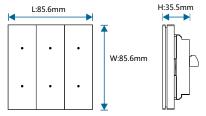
Dimensional Drawing - Front View Figure 6. Dimensional Drawing -Sideview
